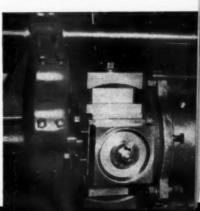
Operations on forward feed clutch parts. (See Figures 7-A and 7-B and paragraph 7).
